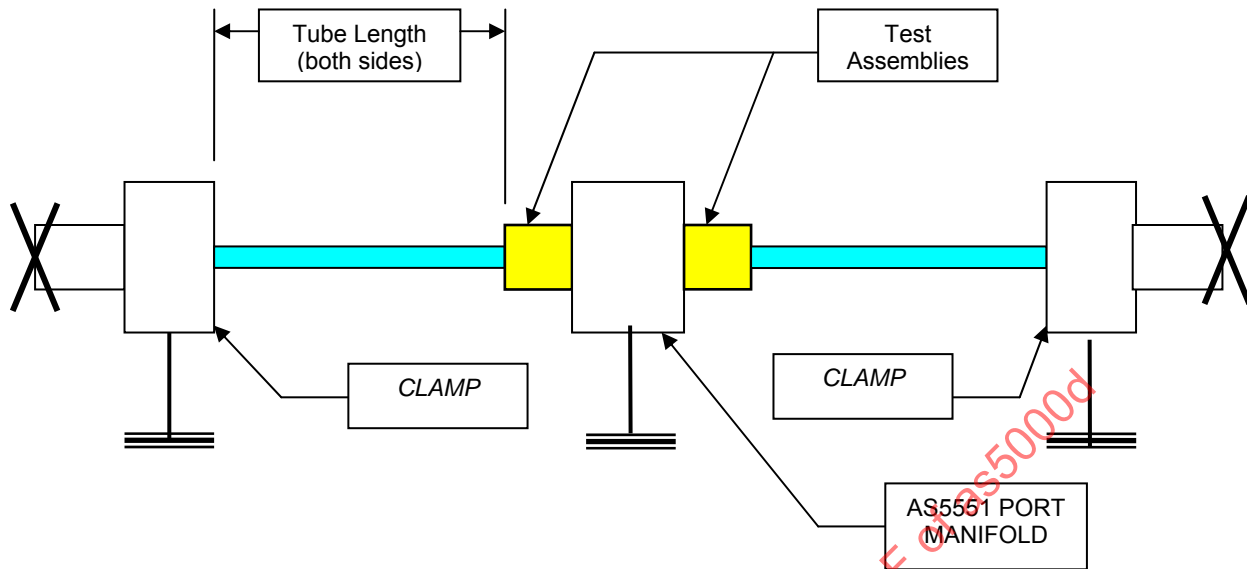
VIBRATION TEST SET-UP, OPTION I
